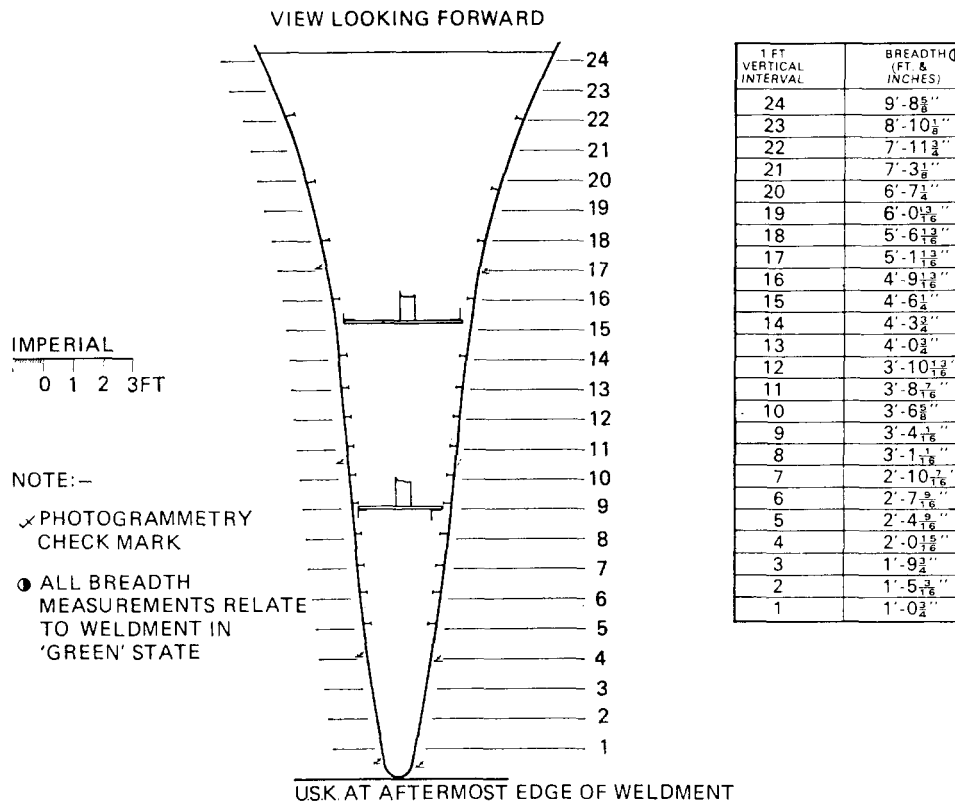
REPRODUCTION OF DRAWING BY PHOTOGAMMETRY OF NEW BOW WELDMENT
